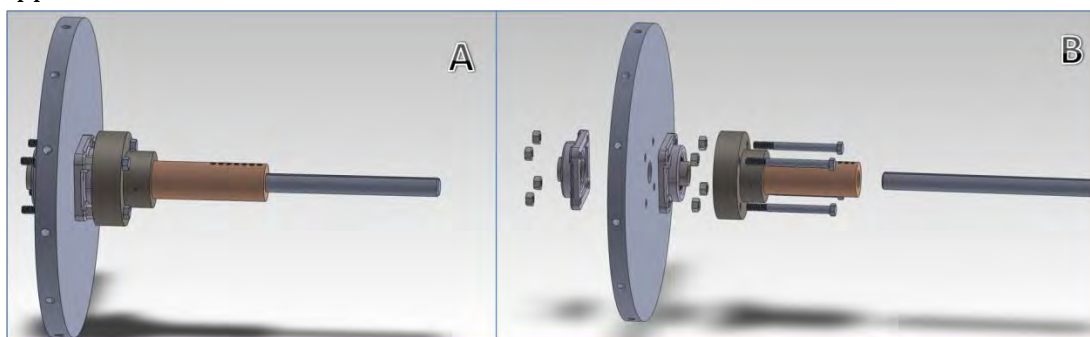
A) Assembled view of adapter with rotor, drive shaft, ball bearings, and required hardware. B) Exploded view of Figure 29.A
